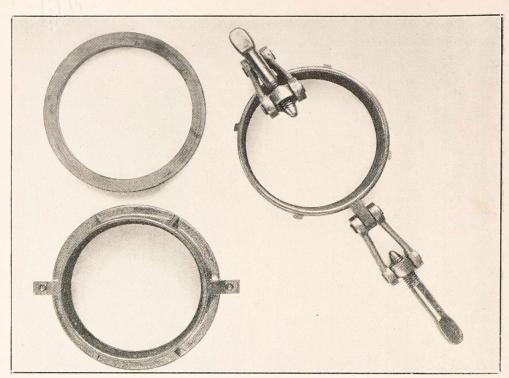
Illustrating the method of construction of the clip joint (with rubber ring) for portable fluming.
